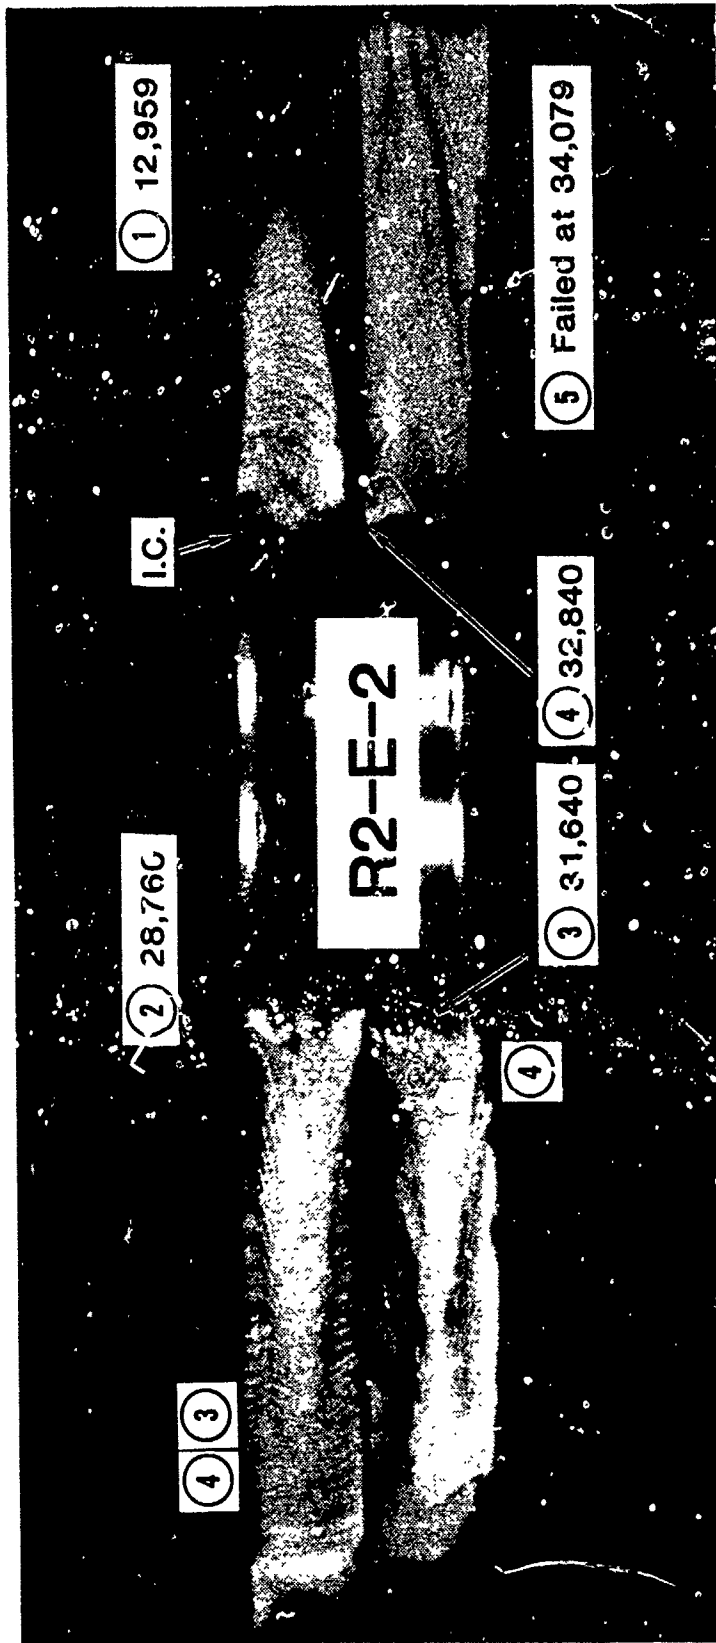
Fracture Surface of Simulated Wing-Pylon Lug Specimen R2-E-2
